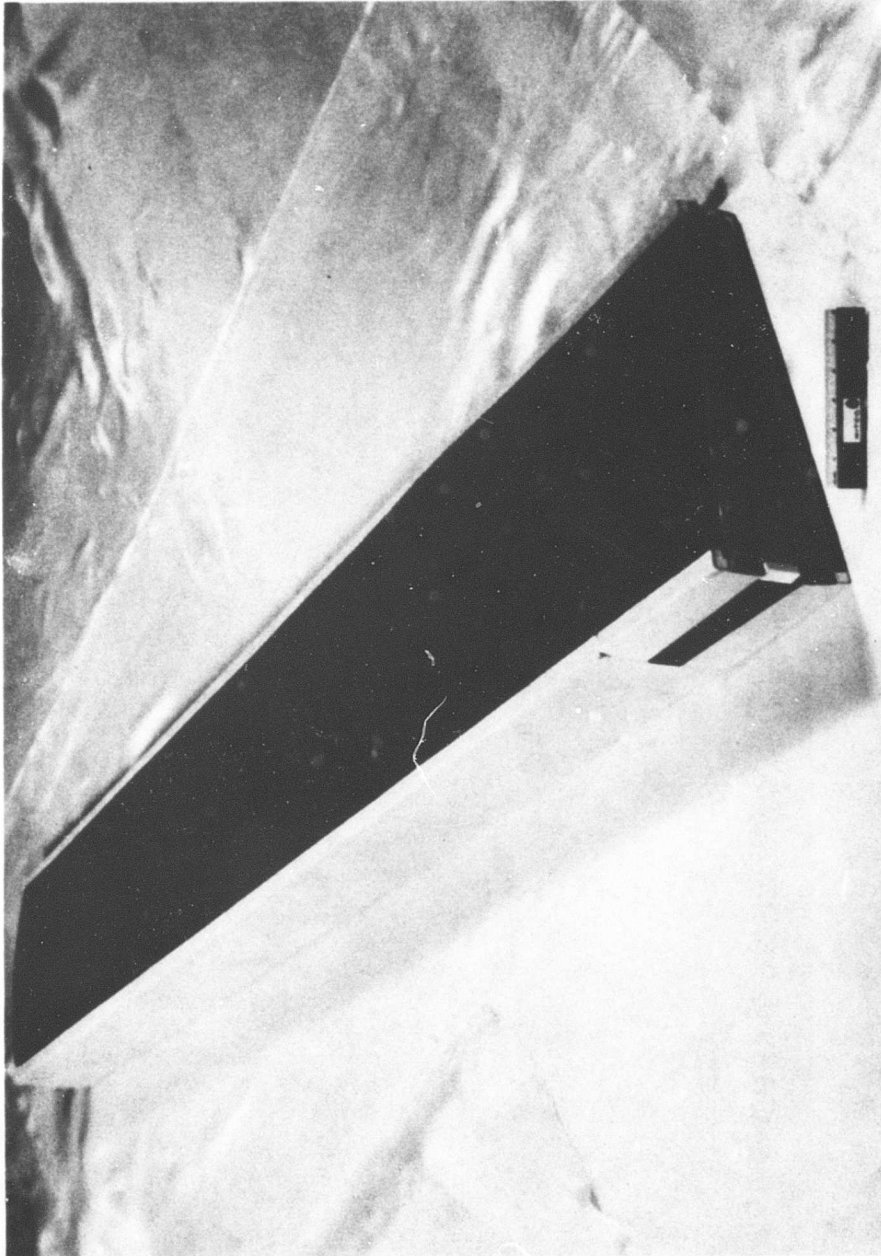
Inside Face With Spars and Honeycomb Assembled.
